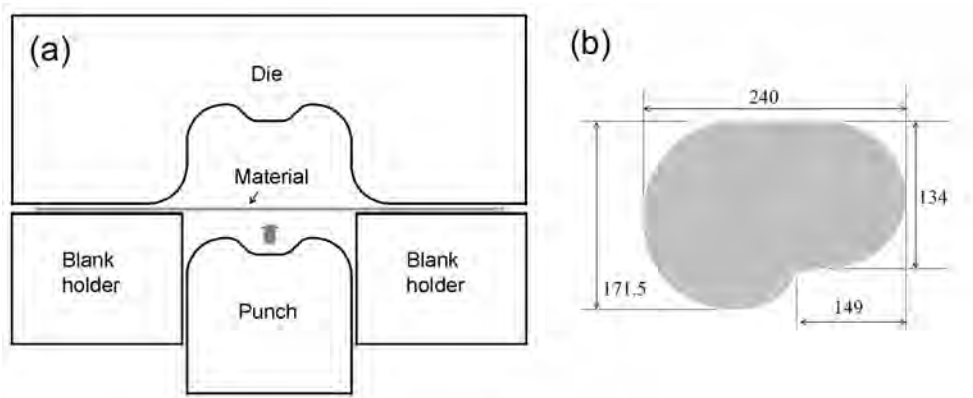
(a) Schematic illustration showing stamping process by the prototyping die set, and (b) shape and dimensions of the trimmed steel sheet prepared for stamping experiments.
